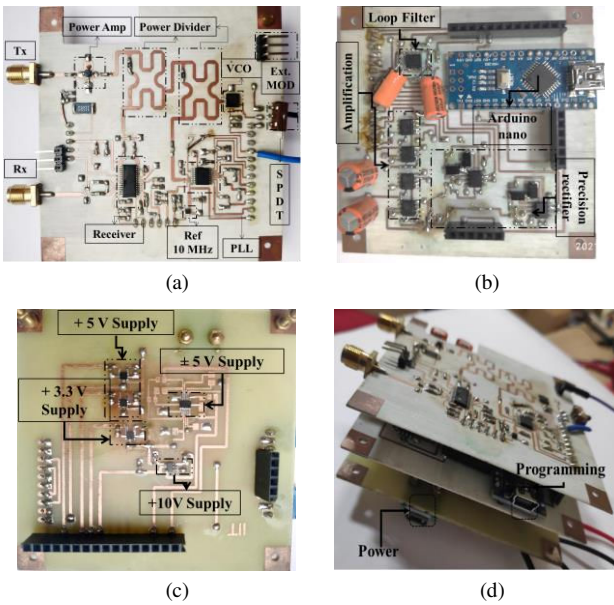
Photographs of the fabricated radar boards, (a) RF, (b) baseband and control, (c) power management boards, and (d) a 3D view before final integration. Total size after final integration is 8 cm × 8 cm × 1.5 cm.
